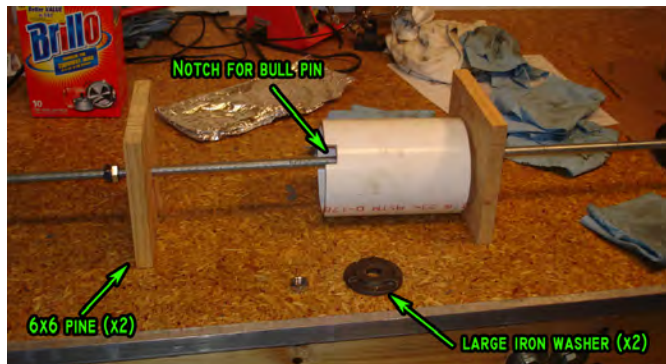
Detail of tool used to remove the bull gear from the spindle.
